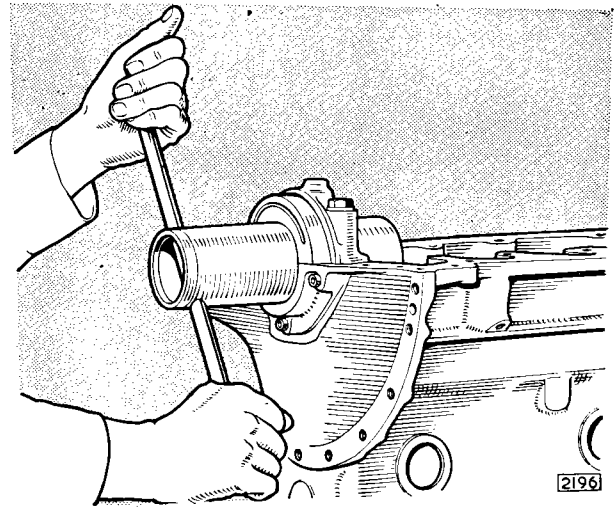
Sizing the rear oil seal using the special tool (Churchill Tool Number J.17.)
